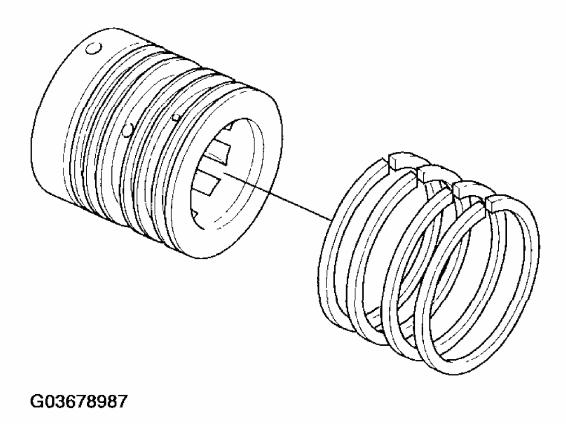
Removing 4 Seal Rings From Sleeve Courtesy of AMERICAN HONDA MOTOR CO., INC.
